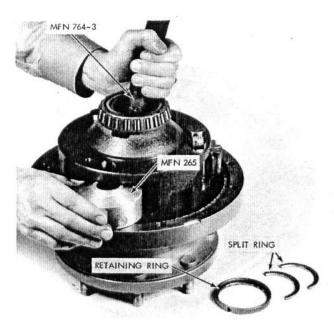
Planetary Carrier PullerMFN265Y & MFN764-3 Installation or Removal
